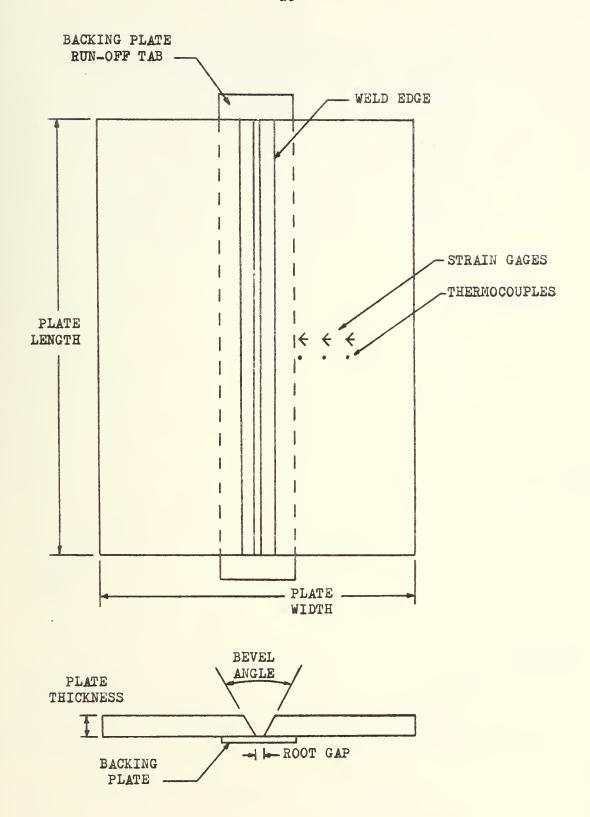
TEST PLATE AND JOINT GEOMETRY.
